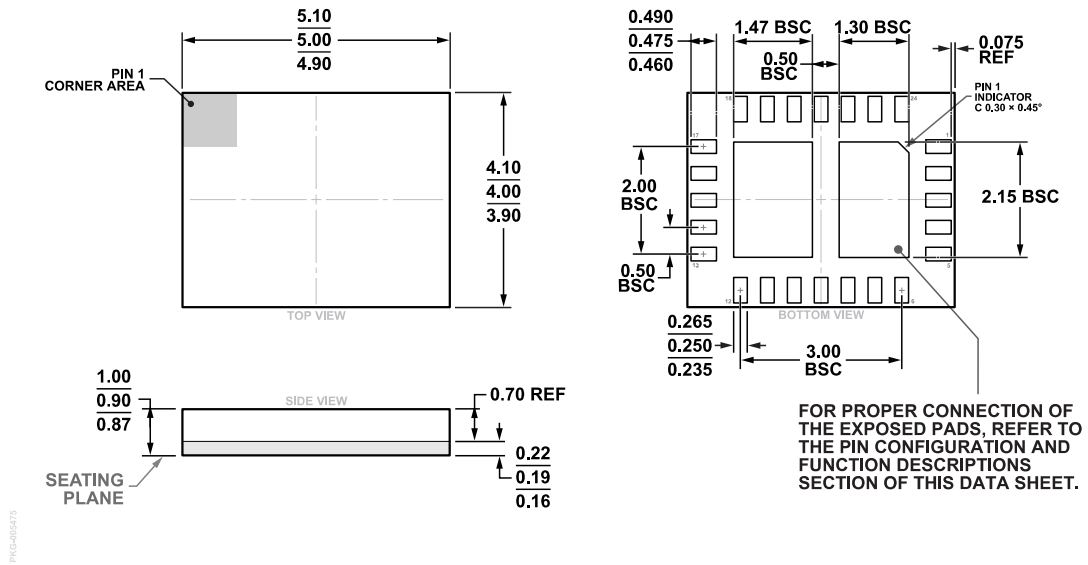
24-Lead Land Grid Array [LGA] (CC-24-9)
